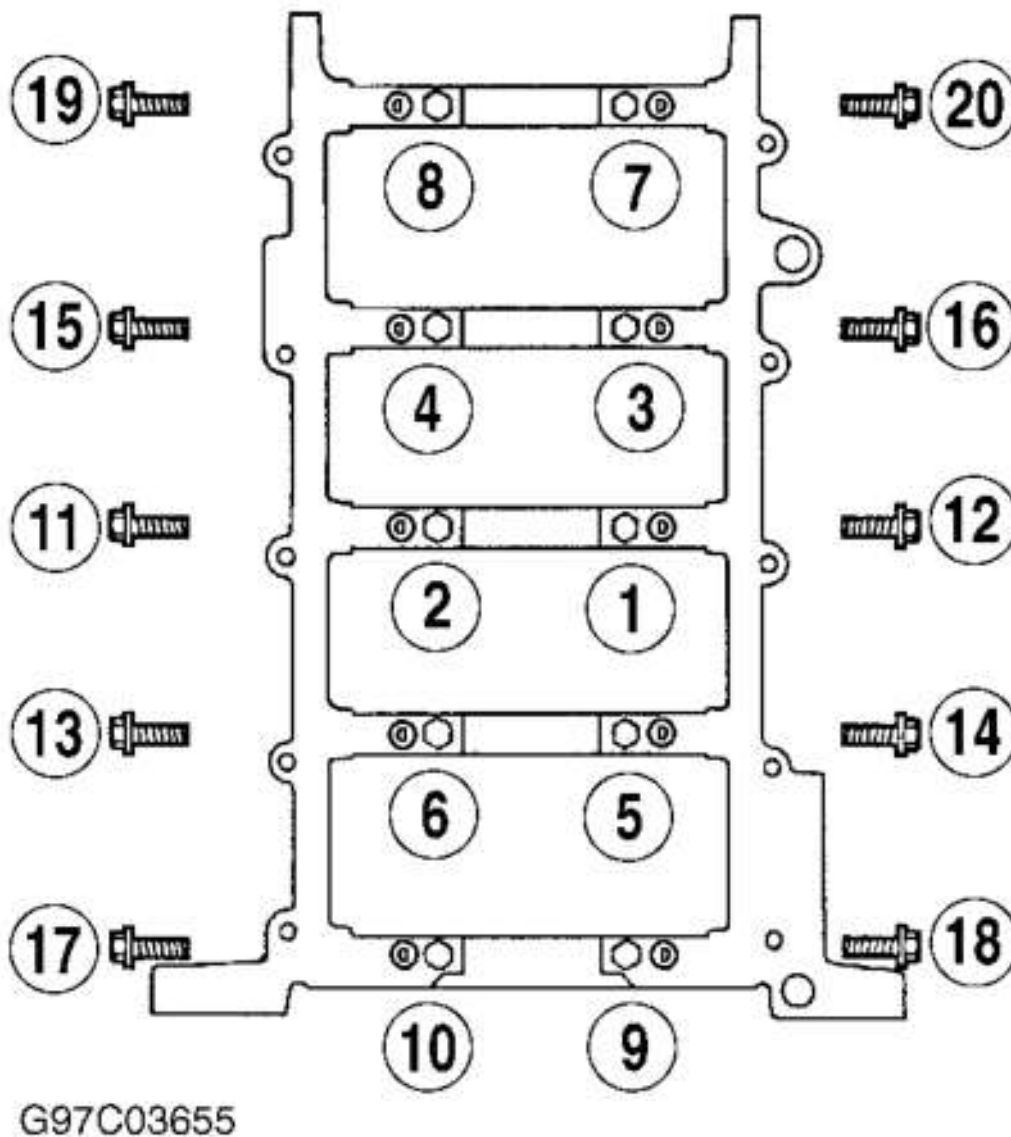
Main Bearing Cap Bolt Tightening Sequence (Windsor Engine)
